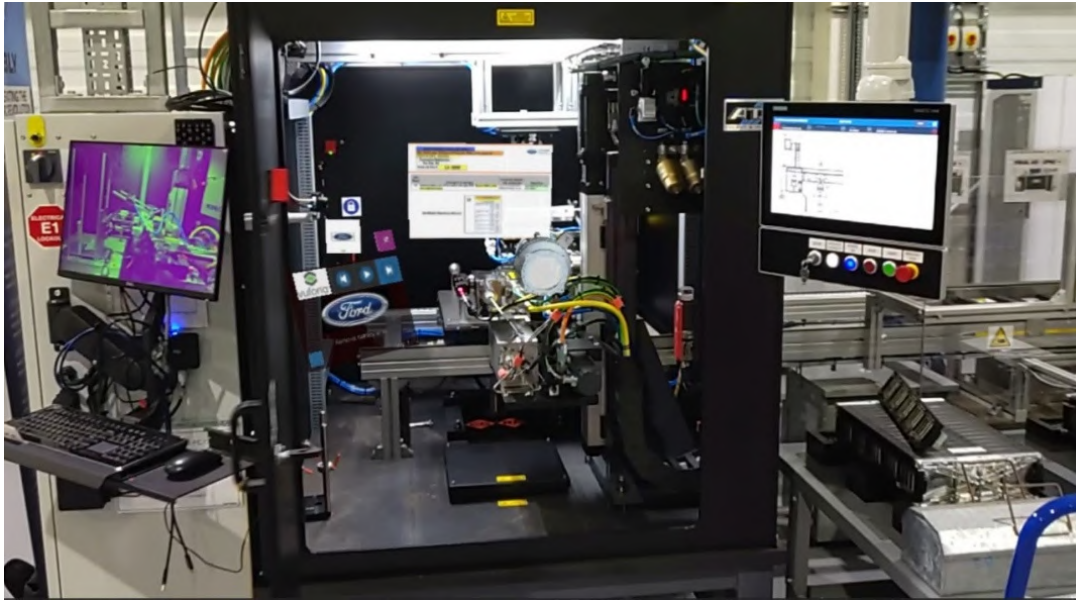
Battery Tab Welding Machine – OP50 Laser welder – with AR view 1
